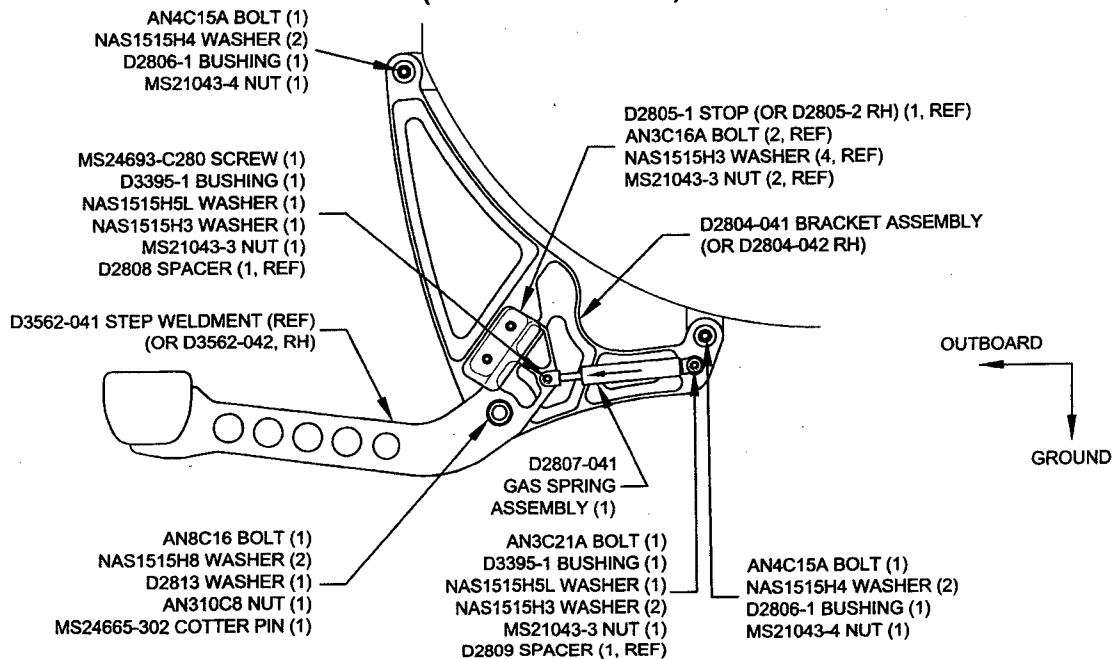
Strut Detail for D412-630-023/024 *Heli-Access-Step™* Installation
